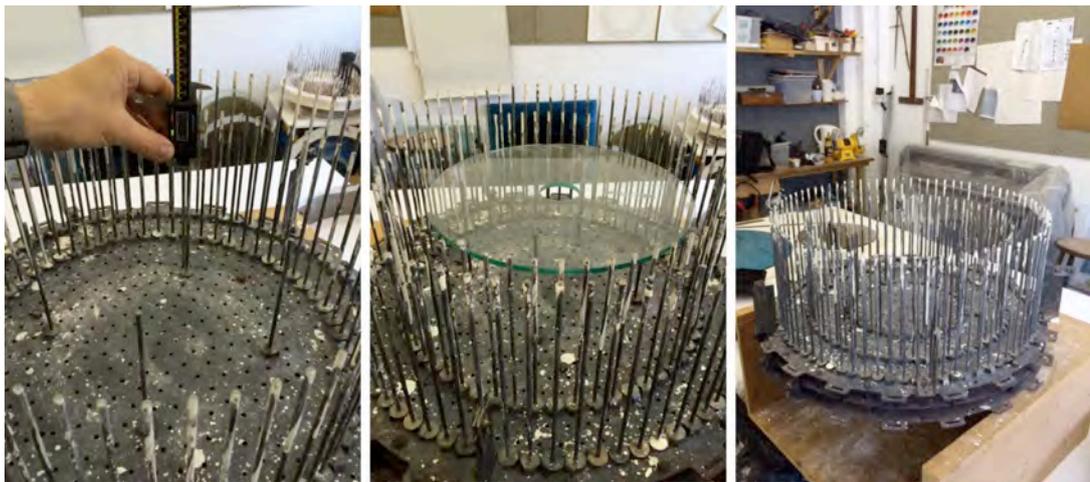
Method established to enable a quick positioning of the pins to a uniform height using a glass disk as a jig to set the pins against, photos: T. Jørgensen, 2014.
